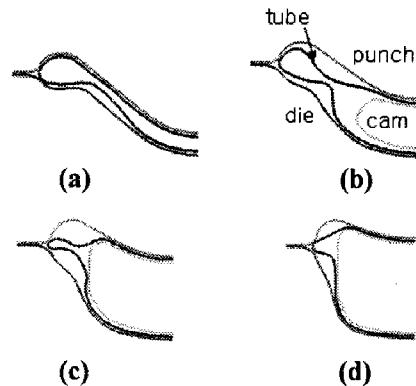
Shape of cross sections of tools and the tube with the initial design after the OP10 stage: at sections (a) A-A'; (b) B-B'; (c) C-C'; (d) D-D'
